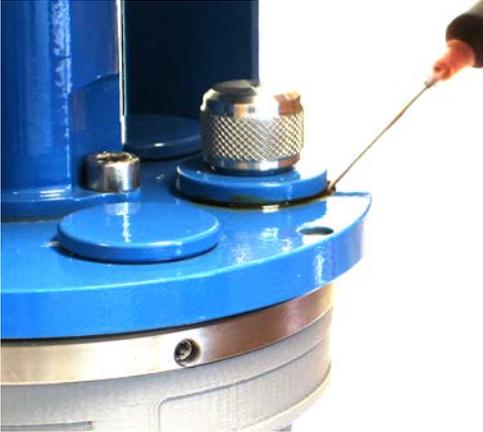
Removal of sealing plug. Use a small piece of paper/cardboard to protect the lacquer of the top-end plate
